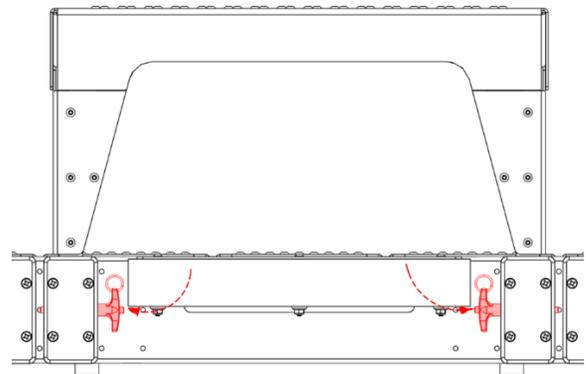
Install Handwheels through Extension tangs and into Extension Receiver plates.
